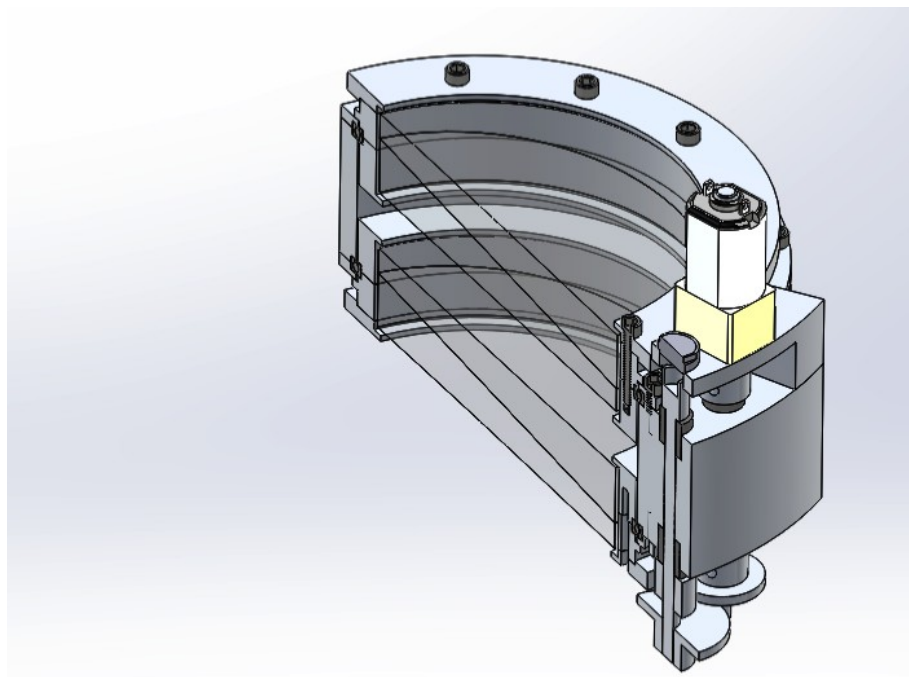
Section through the gear and drive for the magnetic sine/cosine encoder. The gearing produces one revelation of the encoder for each single revolution of the ADC.
